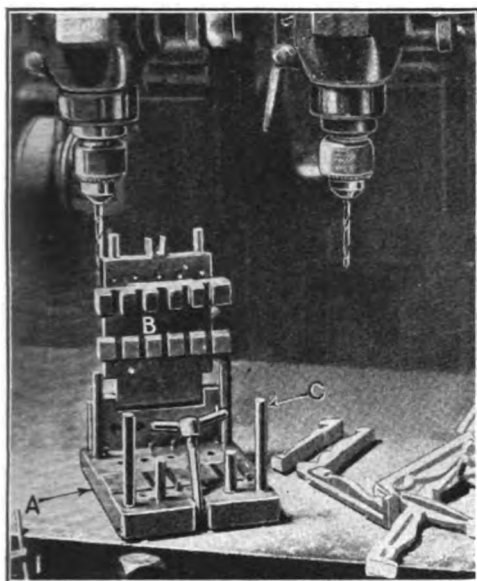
DRILLING THE TRANSFORMER FRAME. FIG. 2.—ASSEMBLING KEEPERS FOR TRANSFORMER CORES
